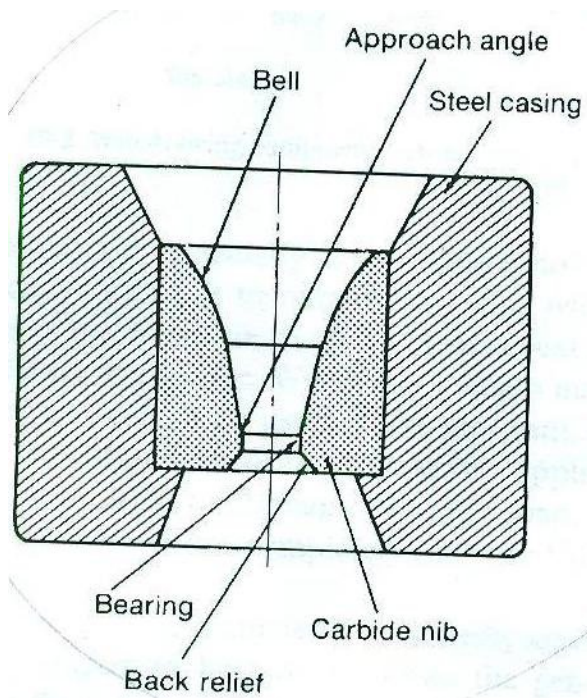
Cross-section of a wire drawing die (Dieter, 1988).
